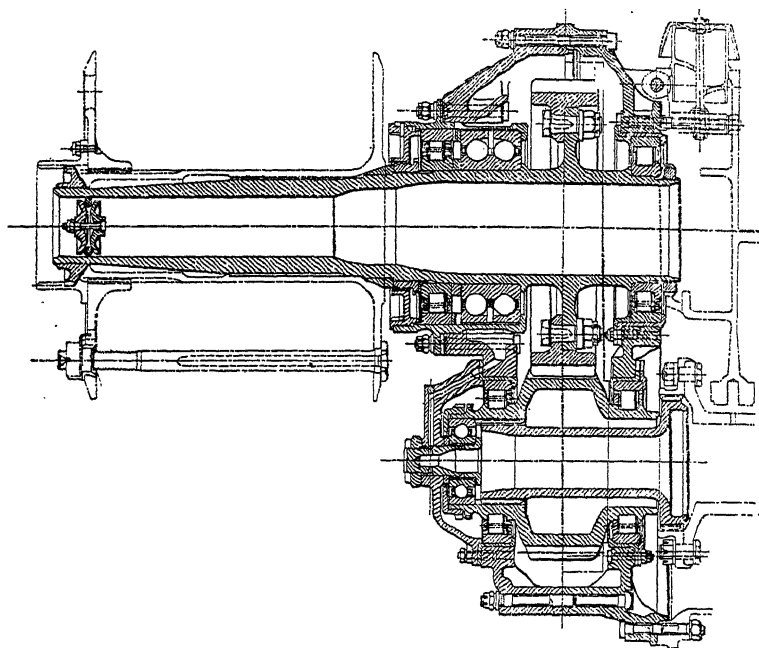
Aircsrew reduction gear unit, showing gears and bearings, etc.
